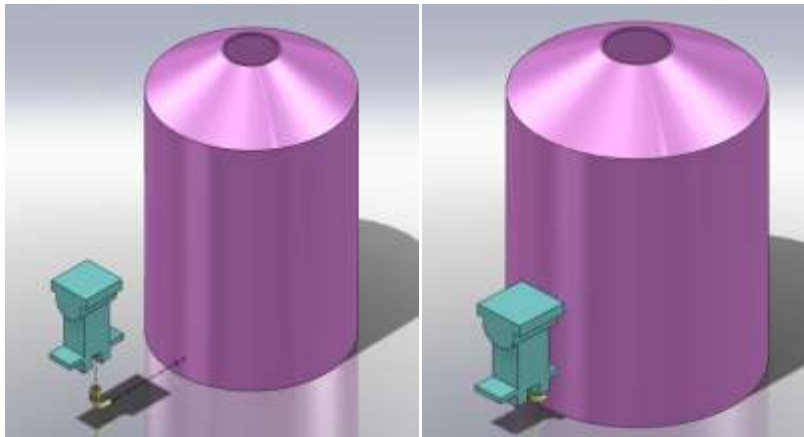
Pressure Transmitter to Stand Pipe Assembly
